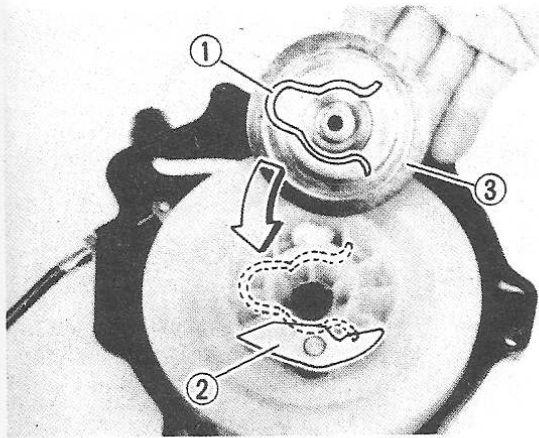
B.39 The spring clip (1) is attached to the drive housing (3) and fits against the pawl (2) when the housing is installed (Sec 21)
